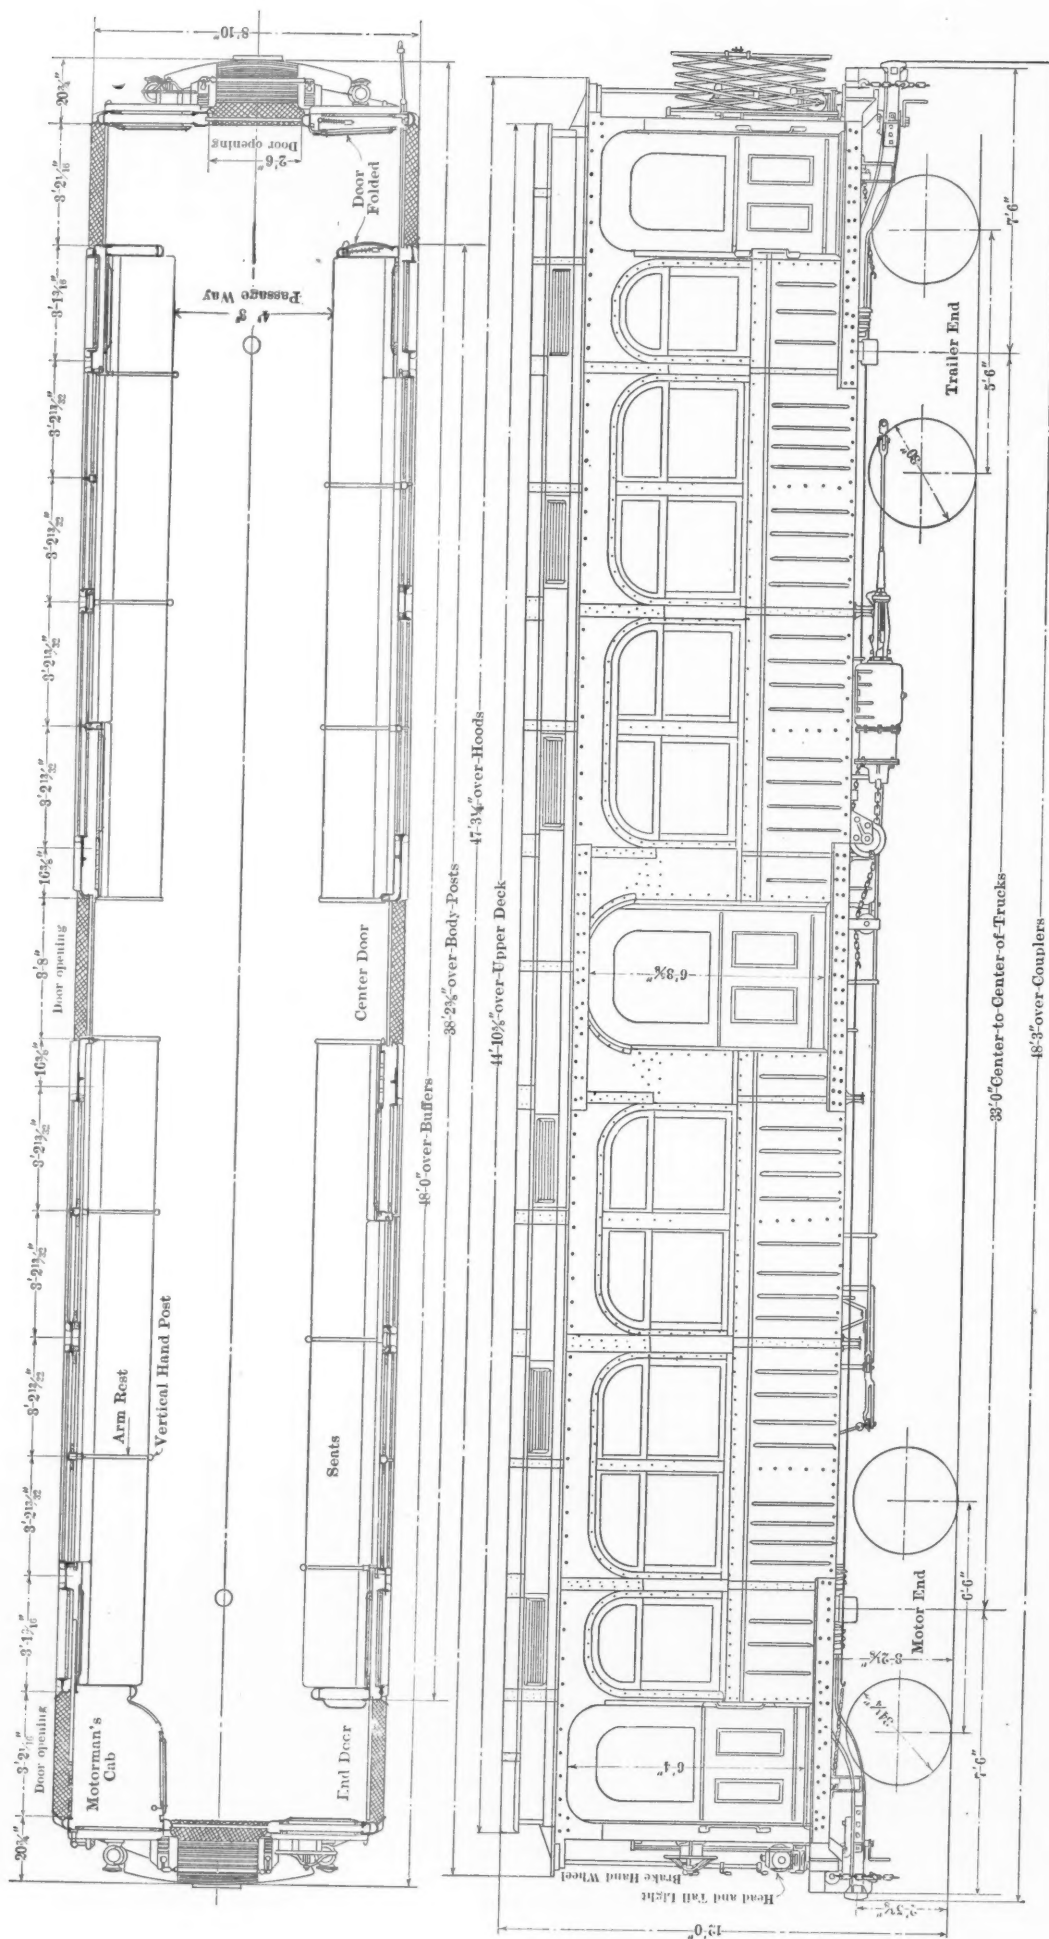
Floor Plan and Side Elevation of Steel Passenger Car; Hudson Companies.
